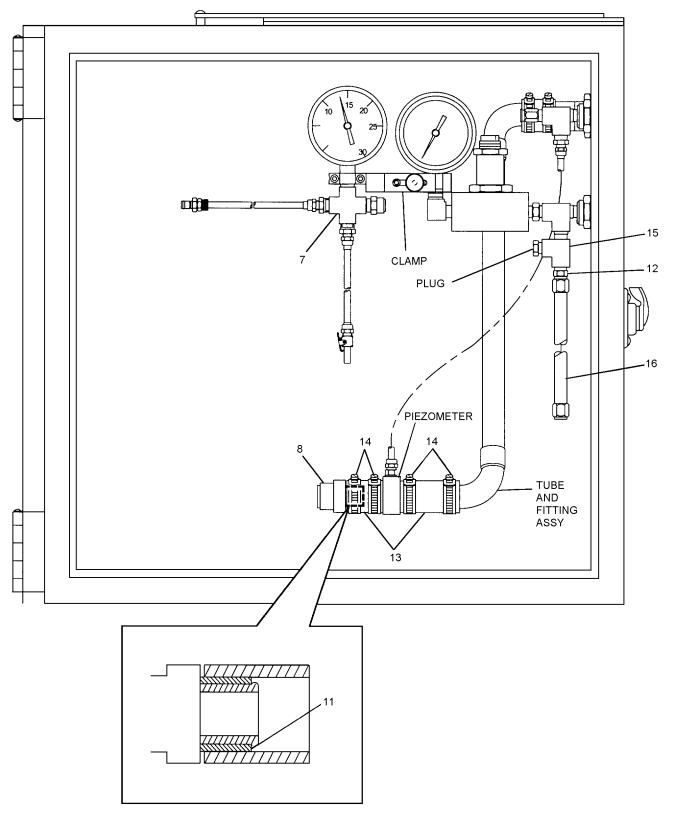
Test Stand Altitude Chamber Bench Test Arrangement
